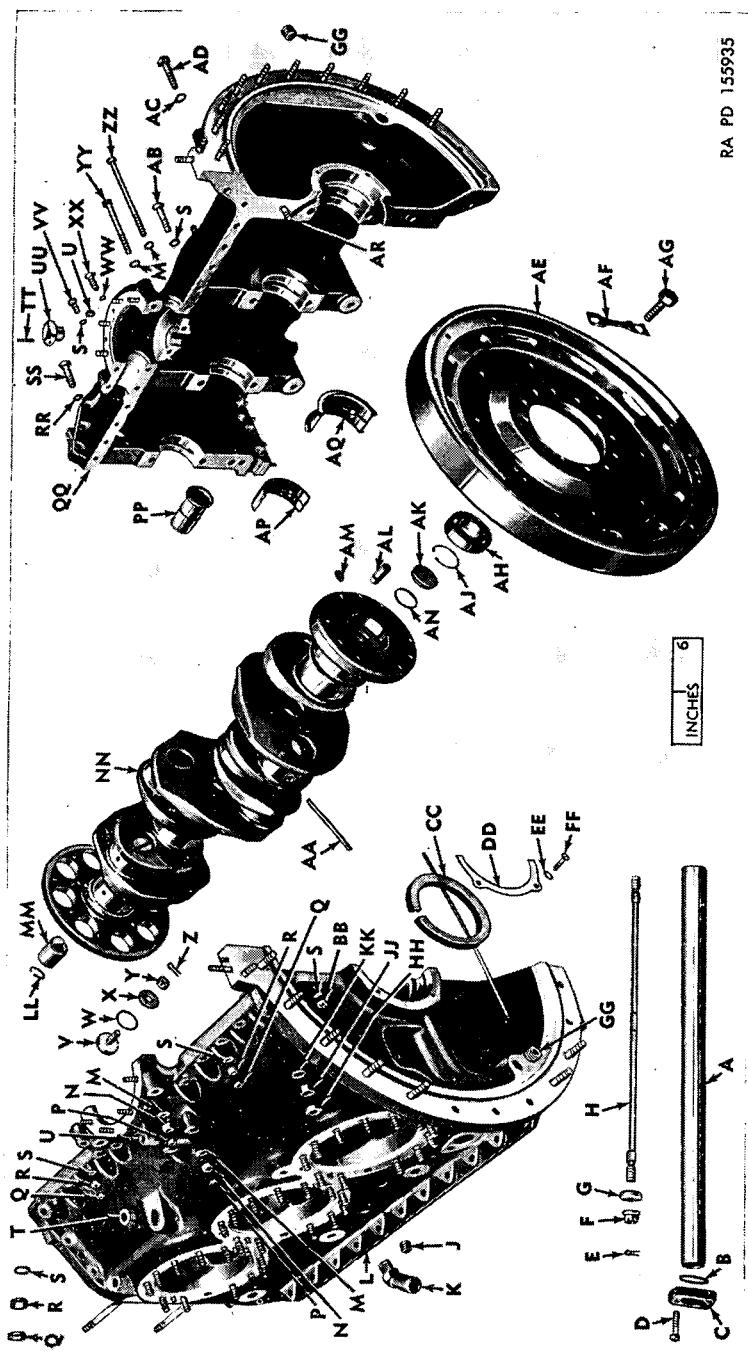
Crankcase, crankshaft, and flywheel—exploded view.
